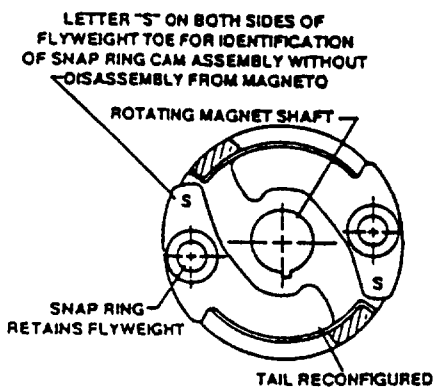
SNAP-RING CAM ASSEMBLY IDENTIFICATION
